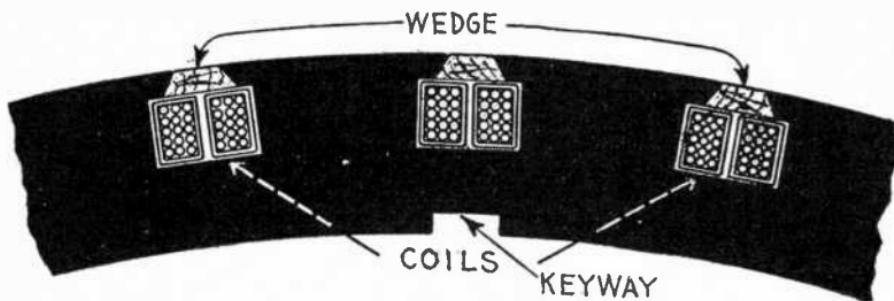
,109.—Laminated core with coils in position; type of punchings used on some machines having concentrated whole coil windings.
